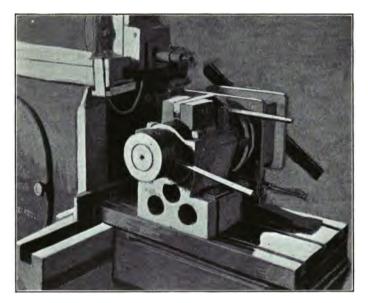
An indexing fixture on the shaper for rod brasses.
